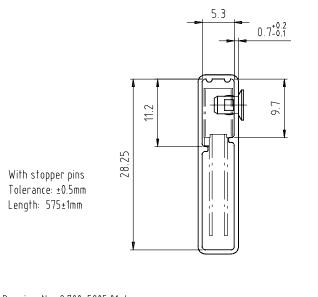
Issue: 1; 25.02.00
